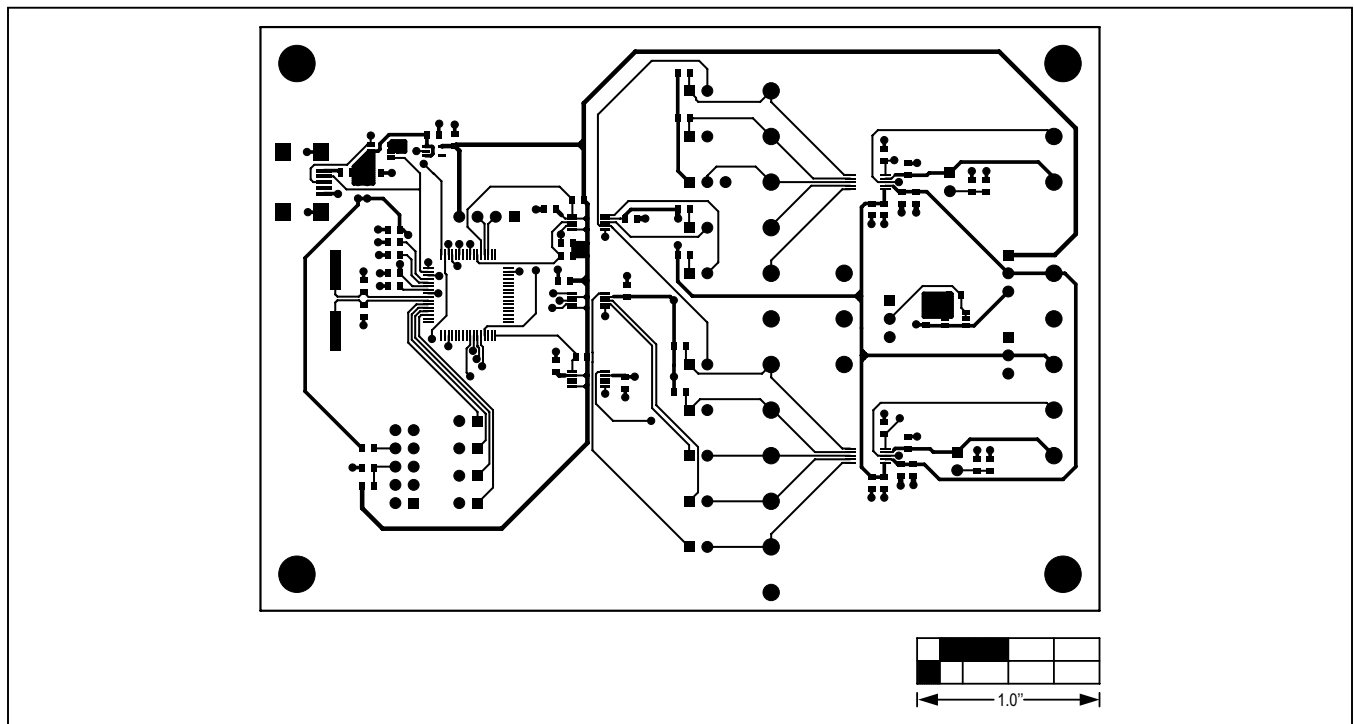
MAX5X05 EV Kit PCB Layout—Component Side
